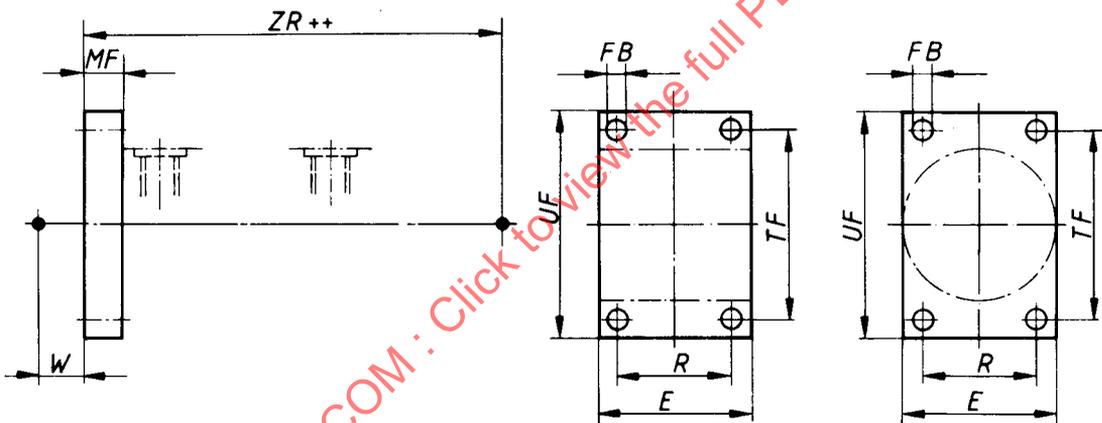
(MDF 1) Head, rectangular flange — Double rod
